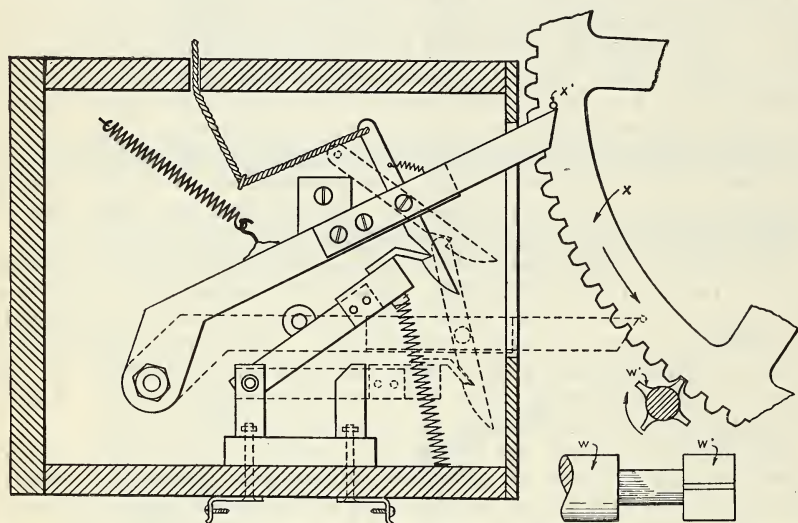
Automatic cut-off device, showing pinion rod in end of shaft, gear meshing with pinion rod, and the switch mechanism
